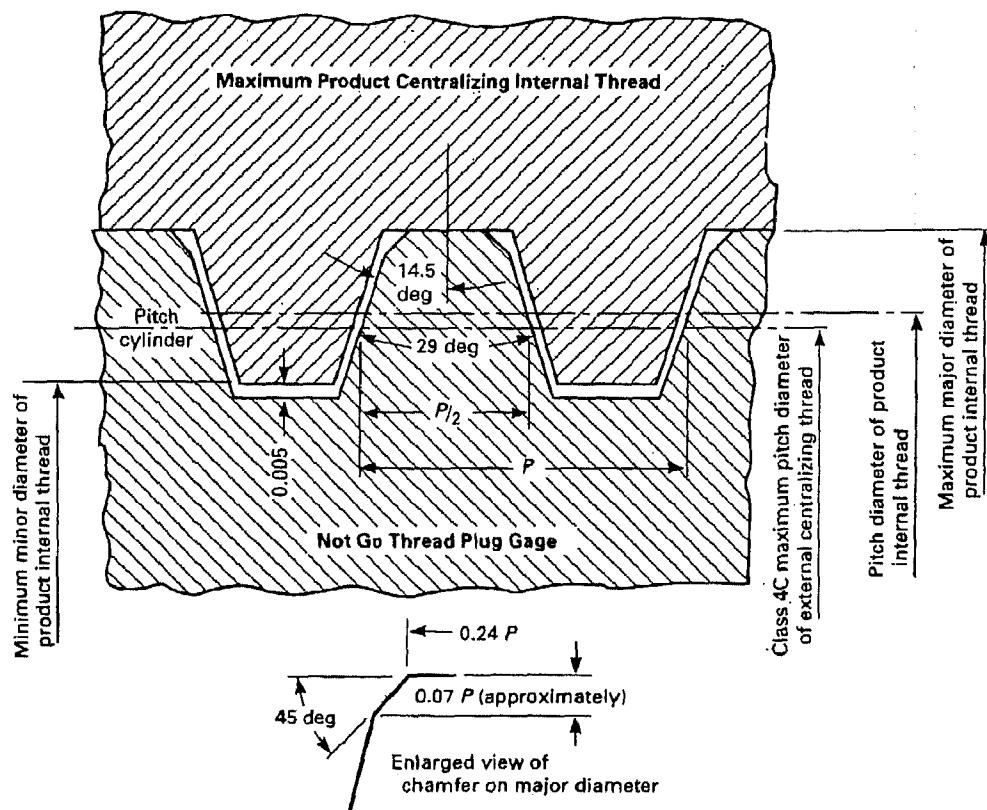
NOT GO THREAD PLUG GAGE FOR
